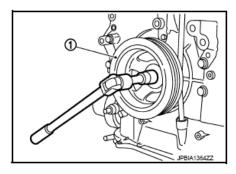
Loosening Crankshaft Pulley Bolt Courtesy of NISSAN NORTH AMERICA, INC.
